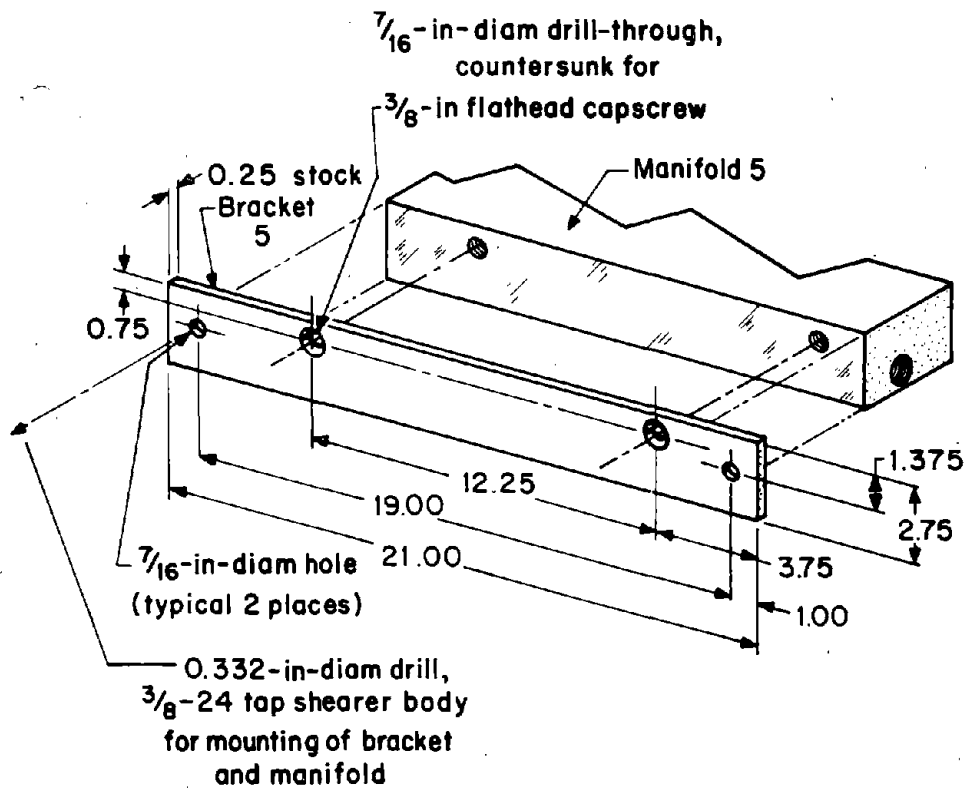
Mounting bracket for water spray manifold 5. All dimensions are in inches.
